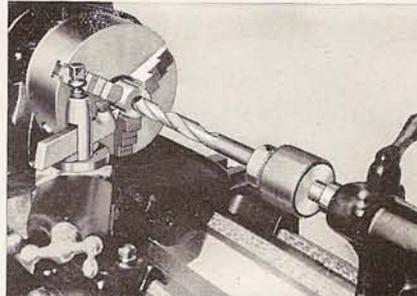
Drilling Hole in Bushing. Drilling of all Kinds can be Done on the Lathe.
